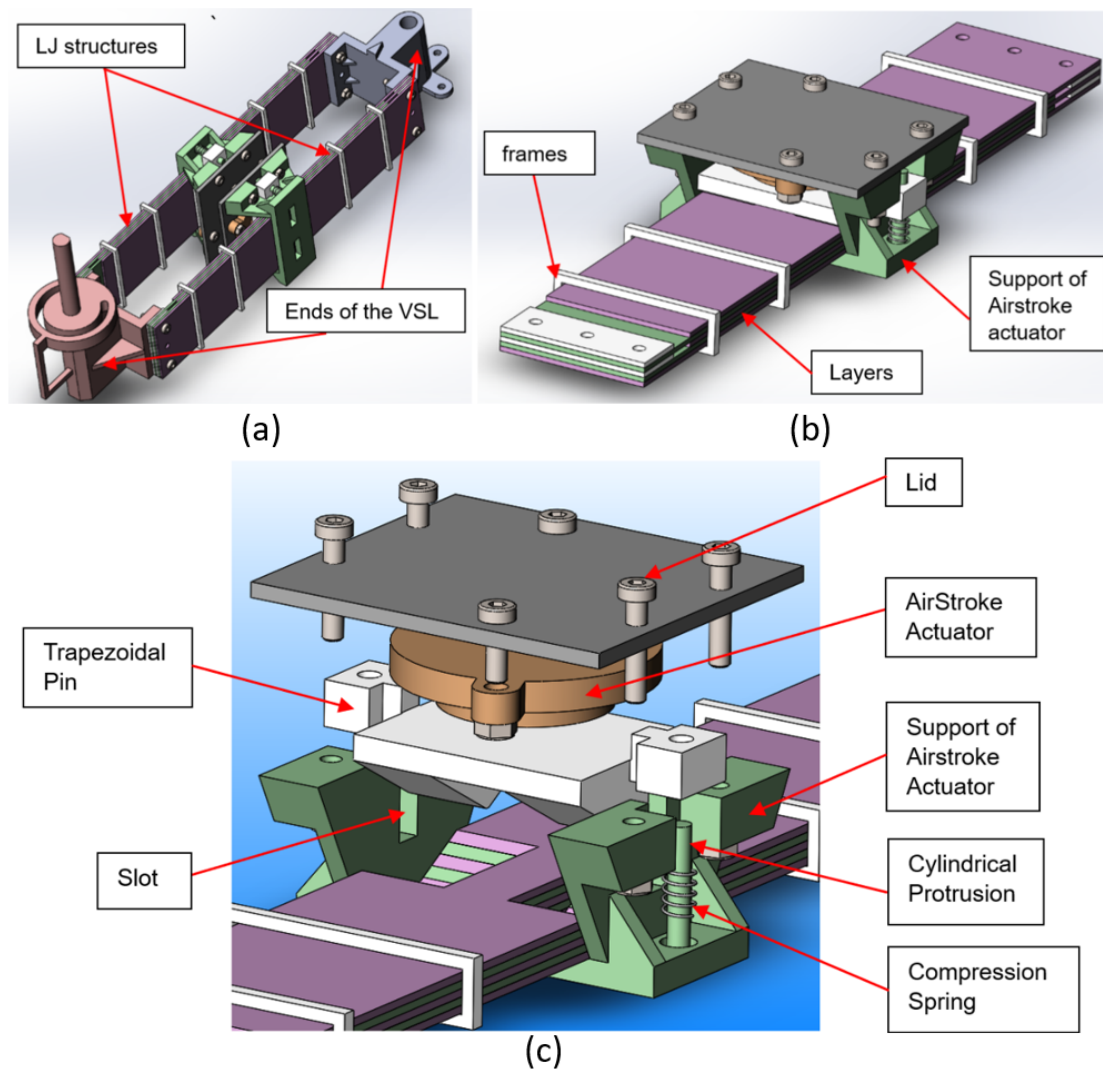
VSL based on the trapezoidal pin mechanism. (a) Design of the whole link. (b) Components of each LJ structure. (c) Detail of the trapezoidal pin mechanism. Figure taken from [35].
